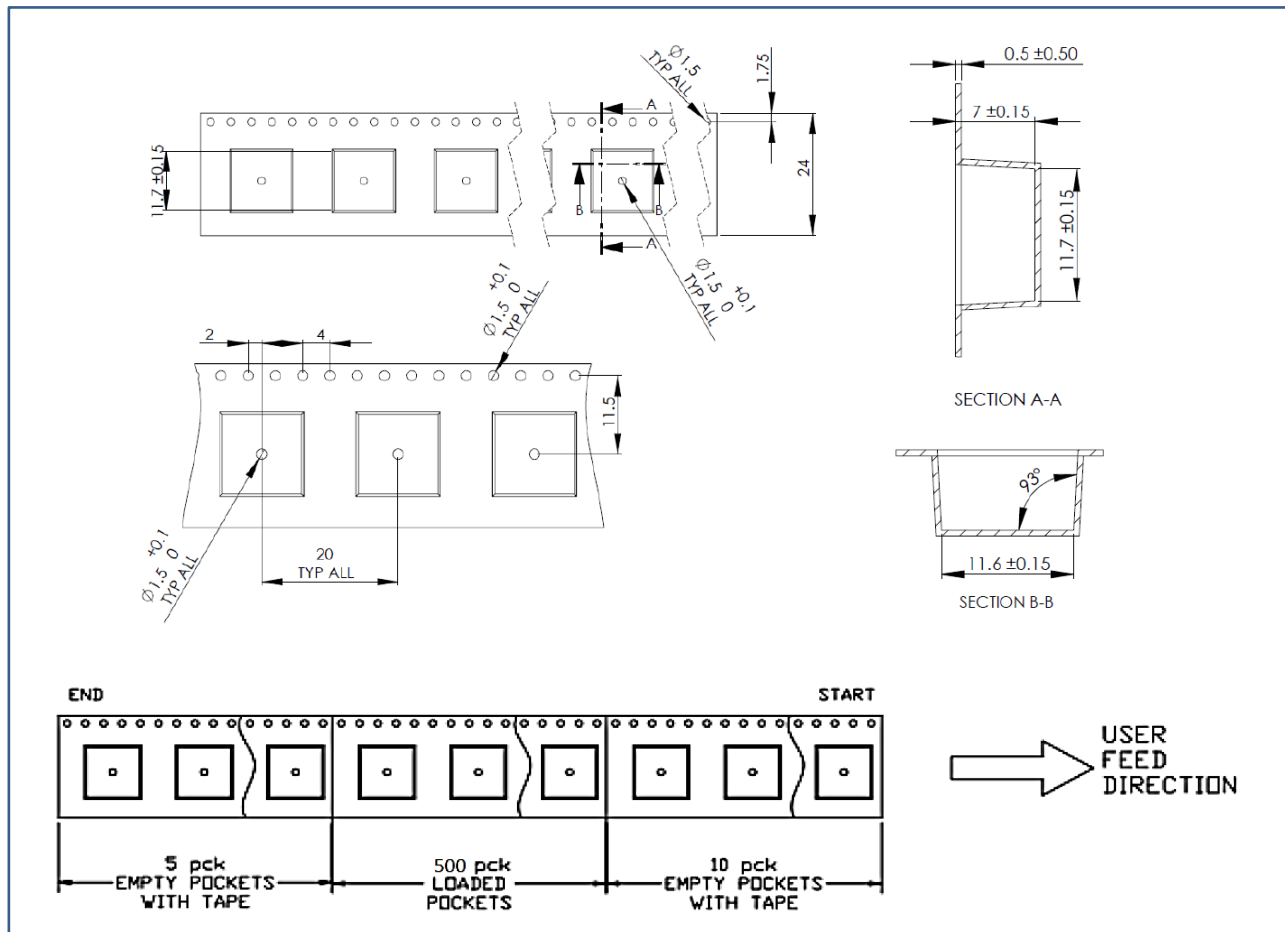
Details of the Tape & Reel packaging (all dimensions in millimeters)
